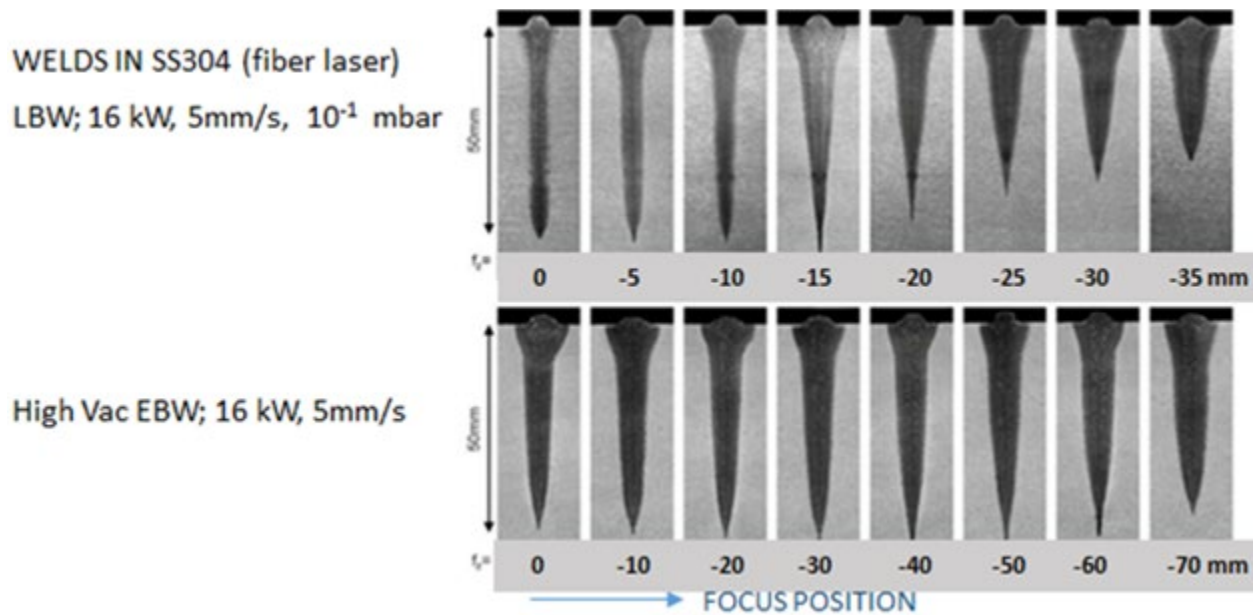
Data showing how weld depth of penetration depends on varying underfocus for EBW and LBW-V in Type 304 stainless steel. Note: weld penetration is about 50 mm in all cases. From: M. Jiang, W. Tao and Y. Chen, "Laser Welding under Vacuum: A Review", J. Appl. Sci., 7, p. 909 (2017).
